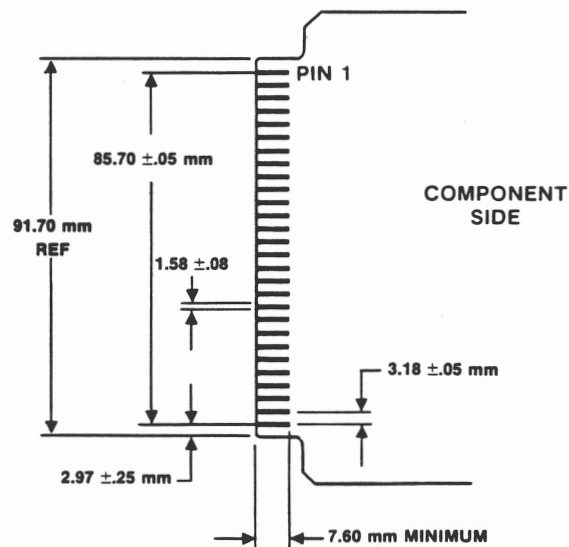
STD BUS Edge Card Finger Design - Metric.
